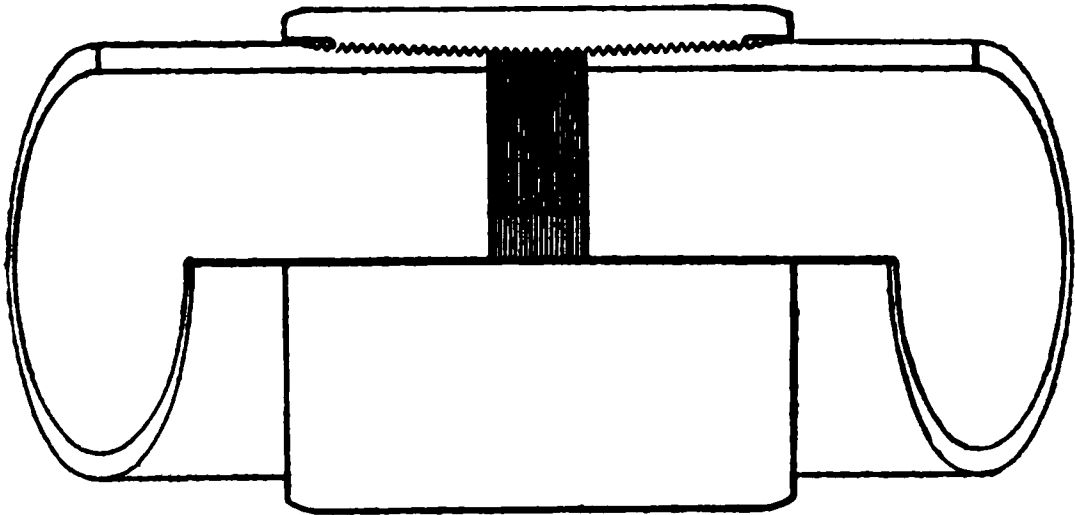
Typical Section of Oil Well Tubing Coupling and Joint
